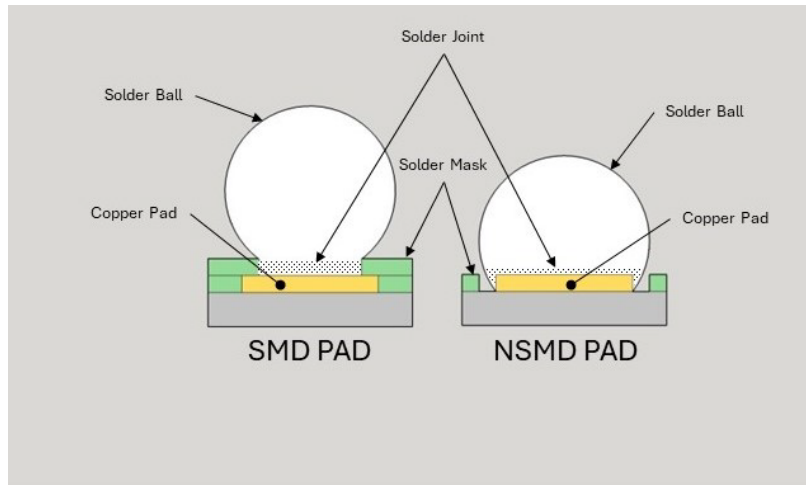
Solder adherence to SMD and NSMD copper pads. Adapted from [57].
